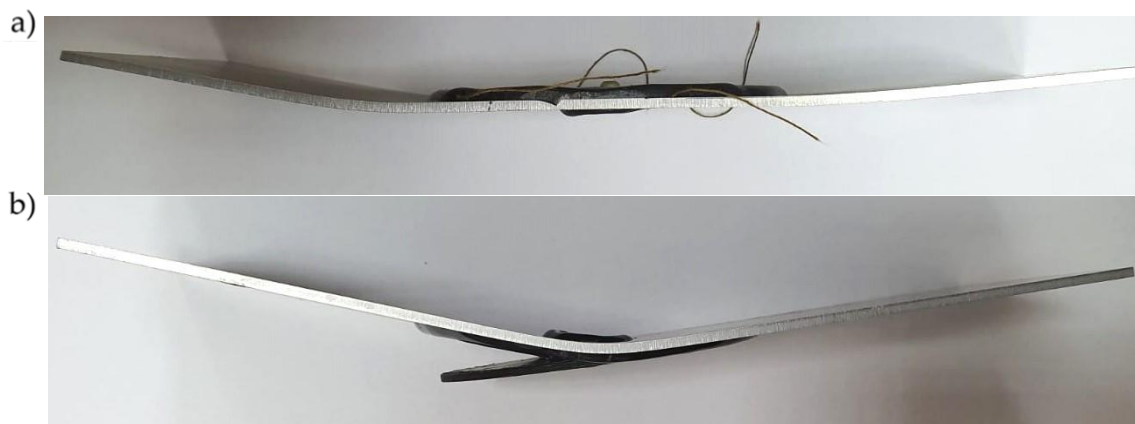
Failure mode of specimens with CFRP patch: a) permanent deformation outside the repair node, b) failure of the adhesive joint
